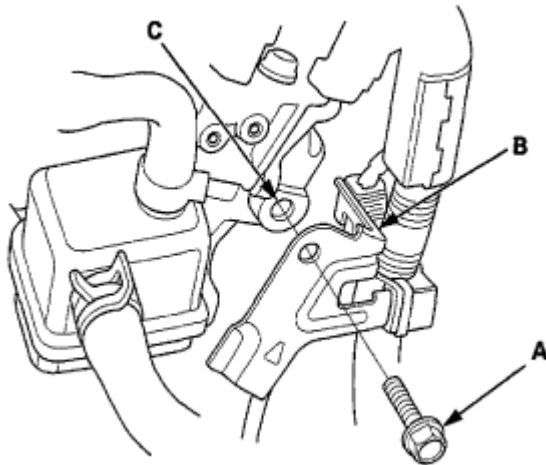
Identifying Bracket Bolt Hole And Harness Bracket Bolt Of Rear Cylinder Head
